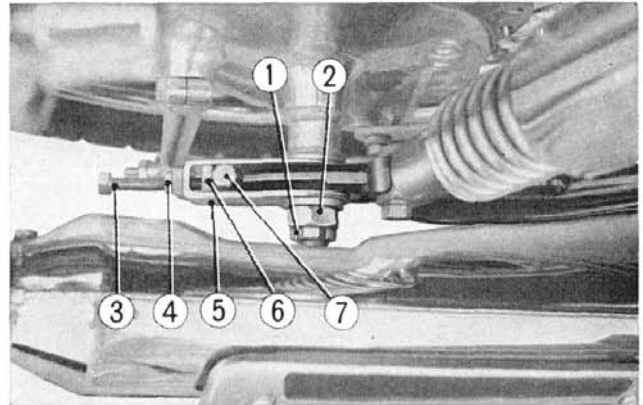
① Cotter pin ⑤ Chain adjuster
